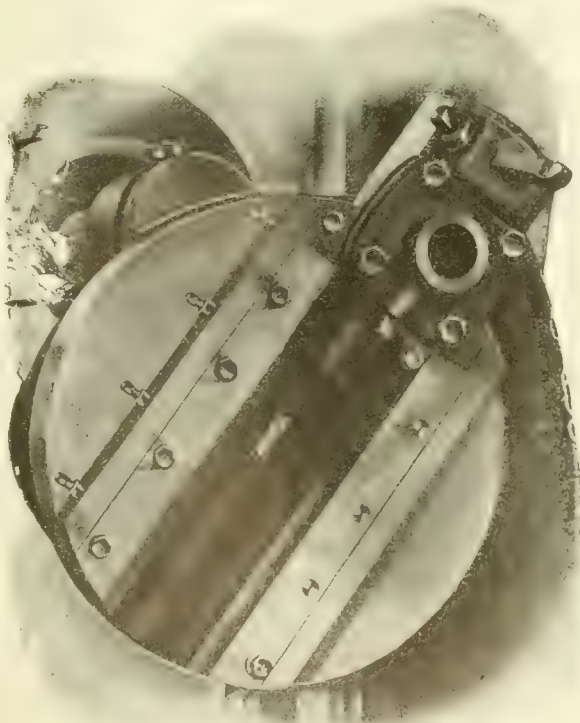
VIEW OF FACING SLIDE AS USED ON STANDARD MACHINE.
